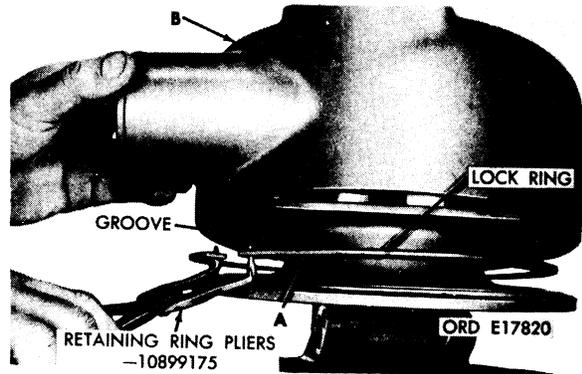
REMOVING OR INSTALLING COMPRESSOR COVER - TURBOCHARGER 7748900.
